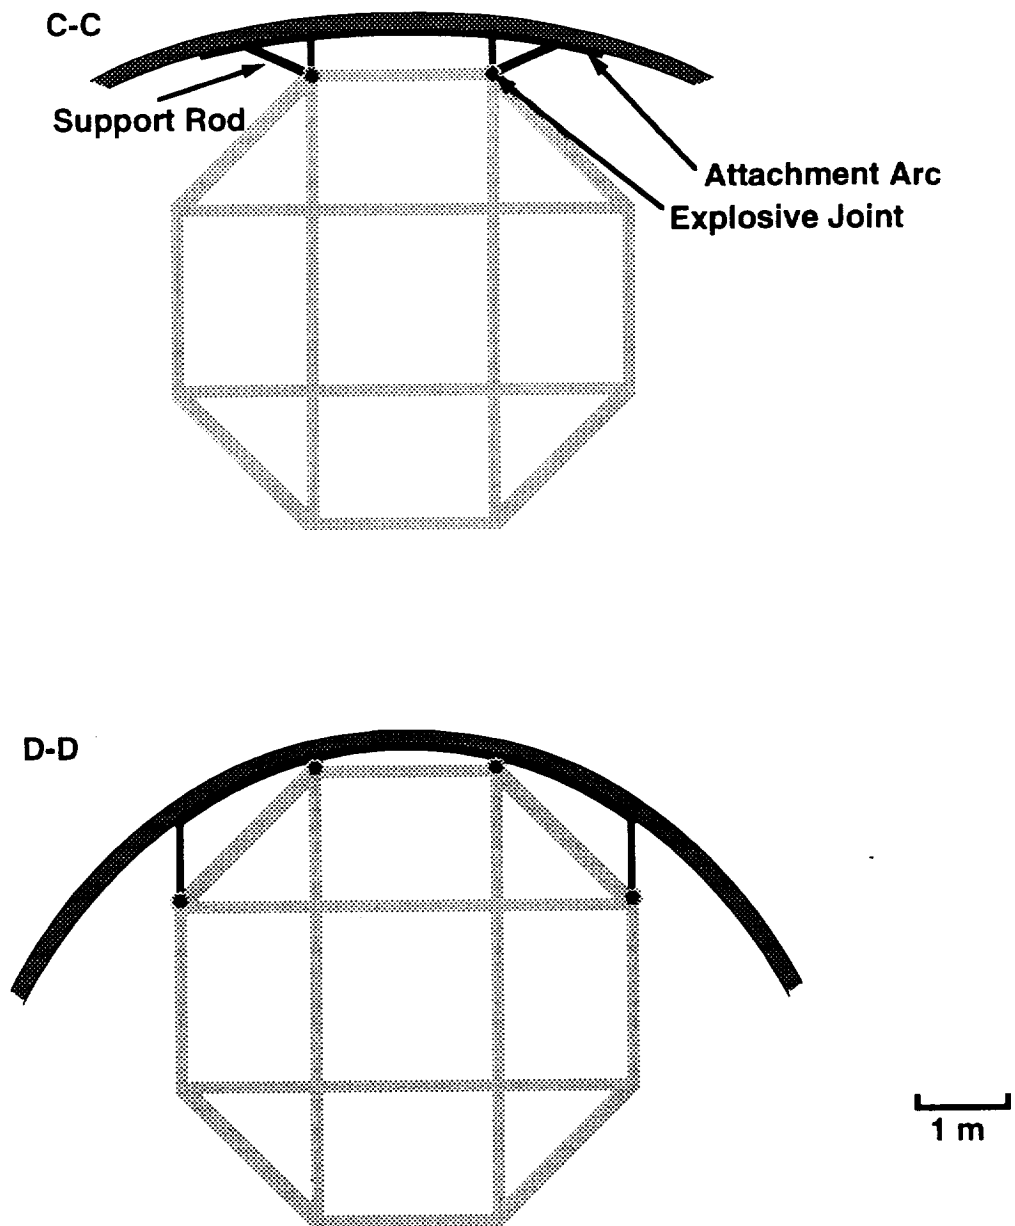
Views C-C and D-D of aerobrake attachment points.
